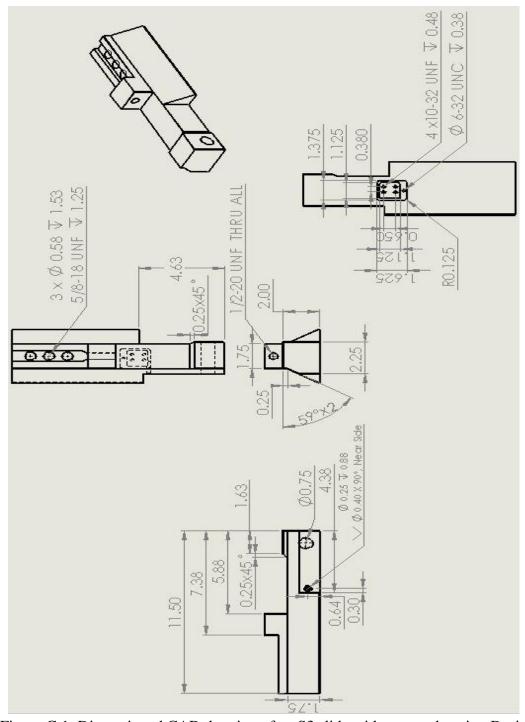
Dimensioned CAD drawing of an S3 slide with recessed cavity, Design #3.
